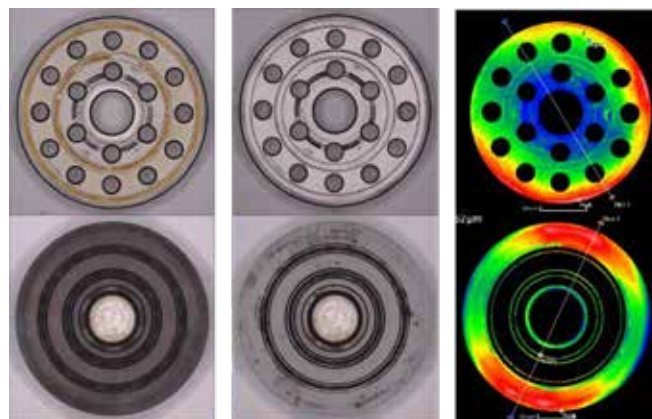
Deposits on Valve Plate and seat (l.); cleaned parts (m.); WLI (r.)
